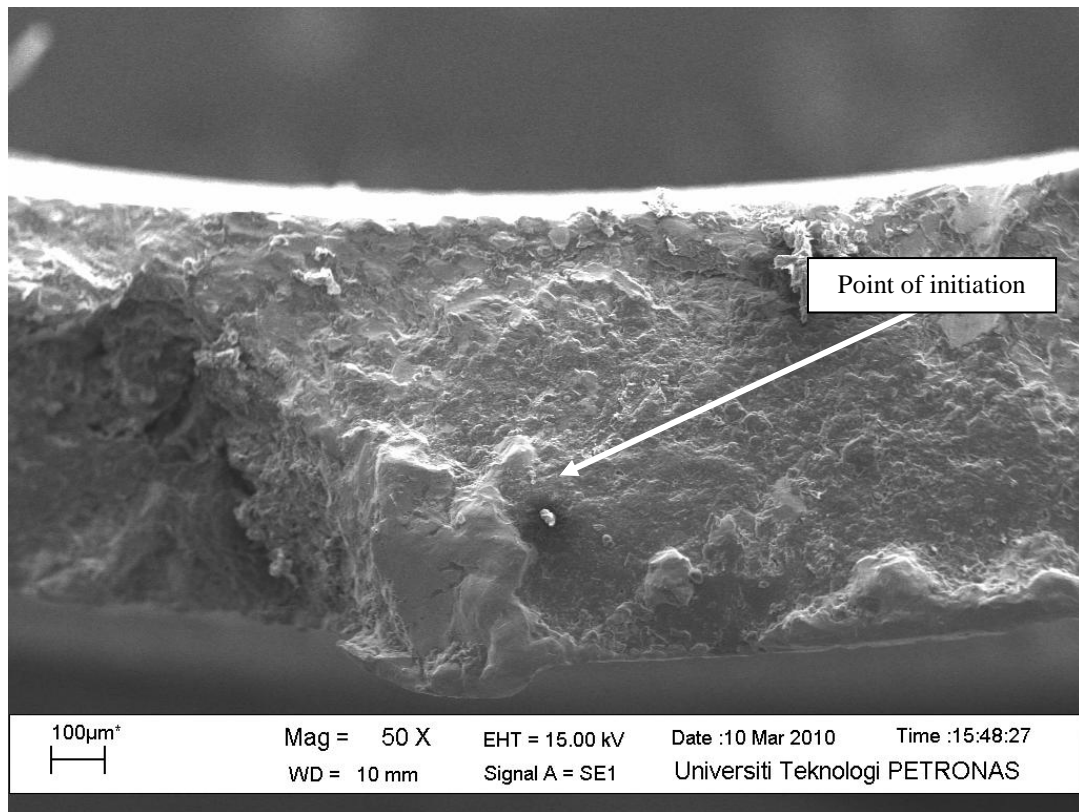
Point of initiation on the fracture surface of sample material.
